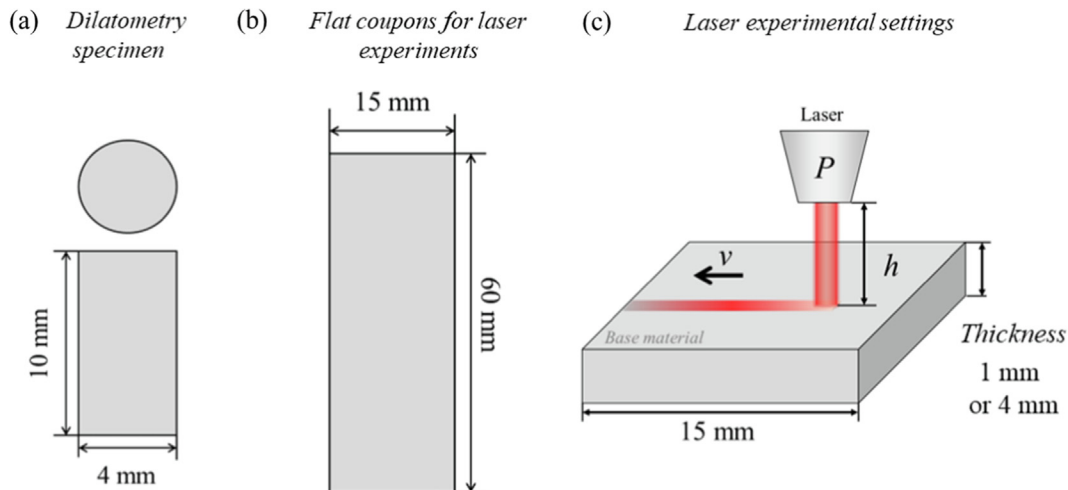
Scheme of different machined specimens: (a) dilatometry specimens, (b) flat coupons for laser experiments, together with (c) laser experimental settings.
